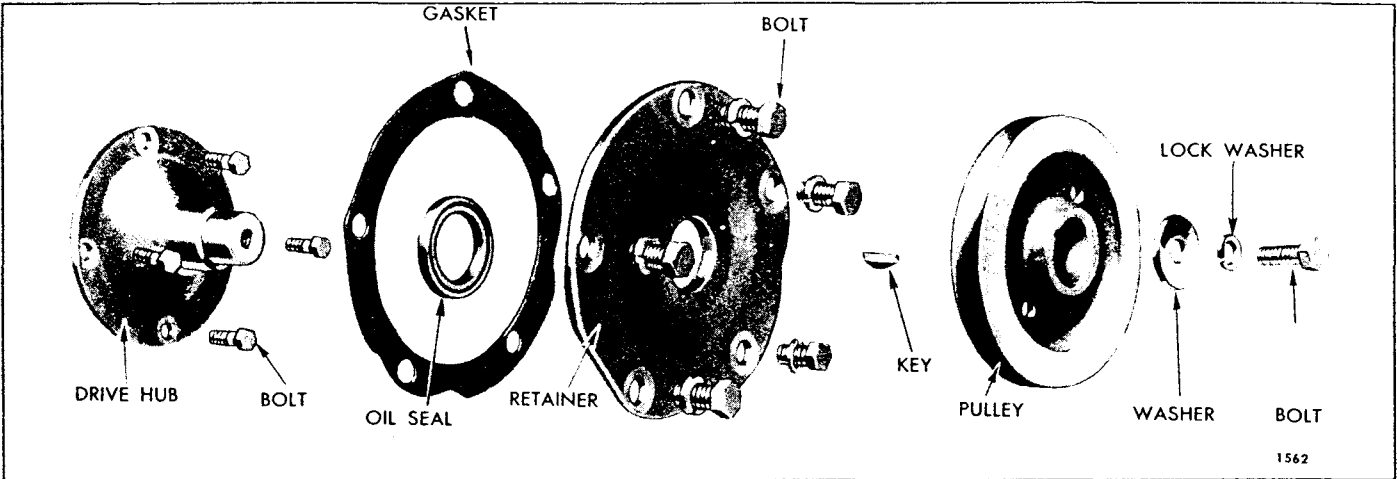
Components of Accessory Drive for Belt-Driven Accessory (Drive Hub Type)
